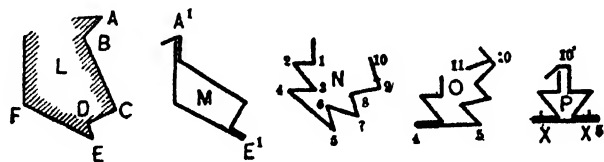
Method of Bending Upper Frame and Skylight Bar
